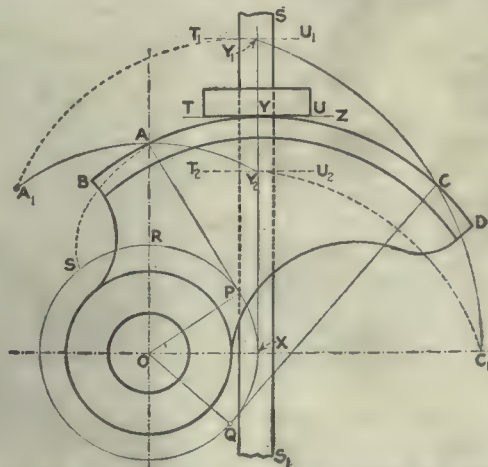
SHOWING THAT THE INVOLUTE IS SPECIALLY ADAPTED FOR AN OFFSET FLAT SURFACE FOLLOWER
